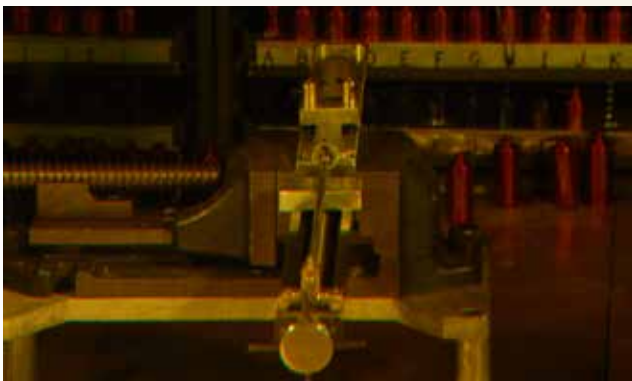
Fixture fabricated to facilitate disassembly of the USU capsules.
